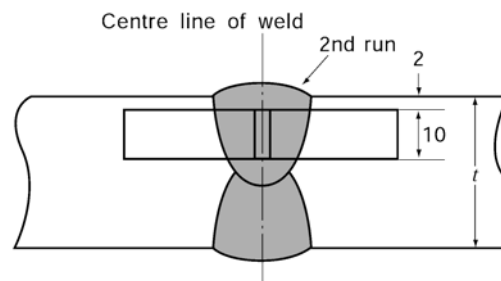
Position of impact Test Specimen for Butt Weld Test Assembly with Two-Run Technique (Unit : mm, t : plate thickness)
